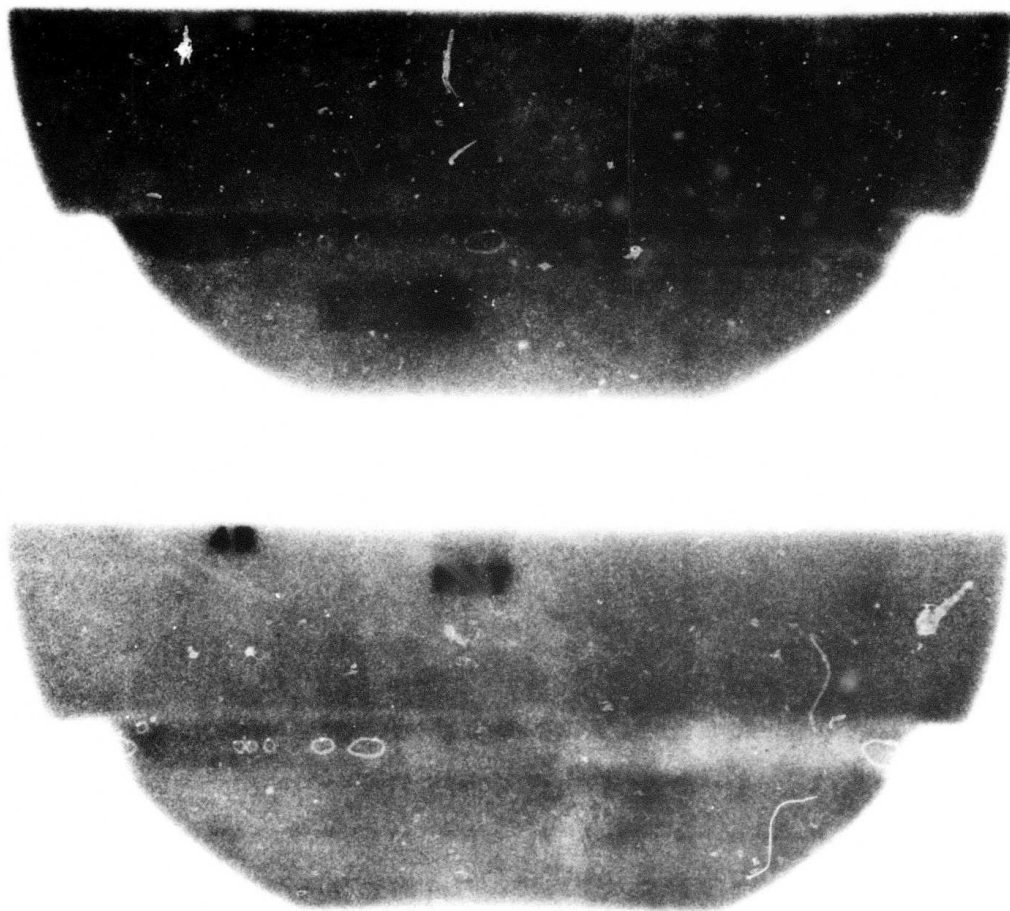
21 - Photographs of GTA weld radiographs
